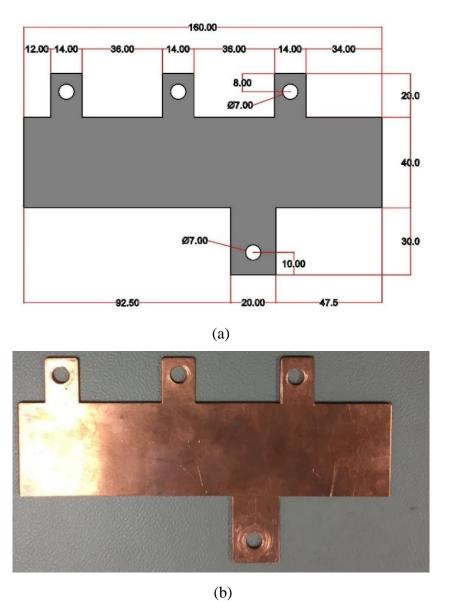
Busbars (a) dimensions (in mm), and (b) picture of machined part
